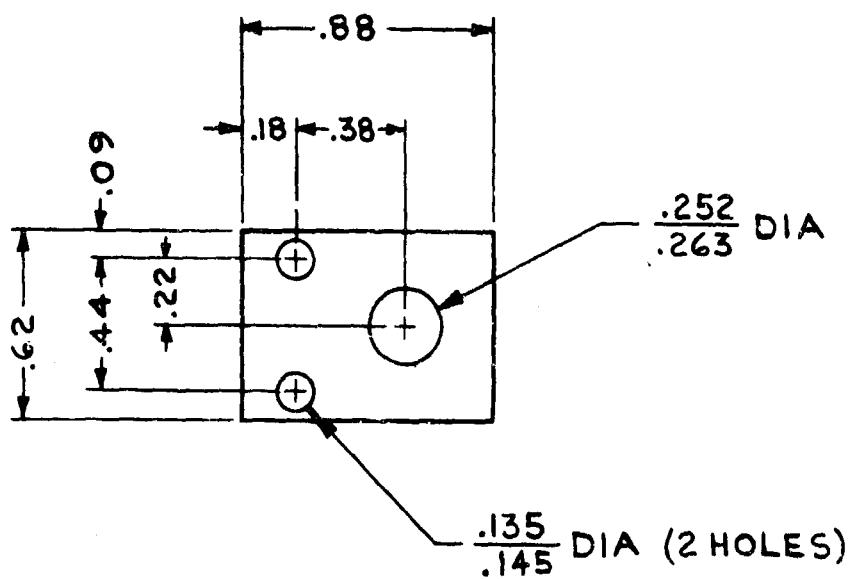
Printed Wiring Board (Assembly) (C2367381)
